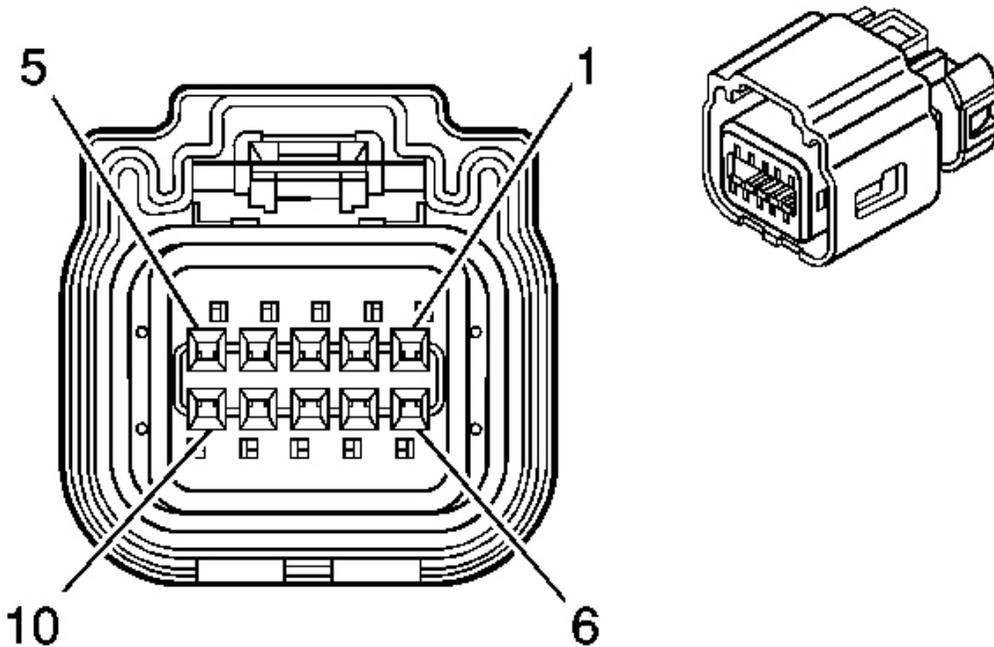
Transfer Case Shift Control Module X2 Connector End View
